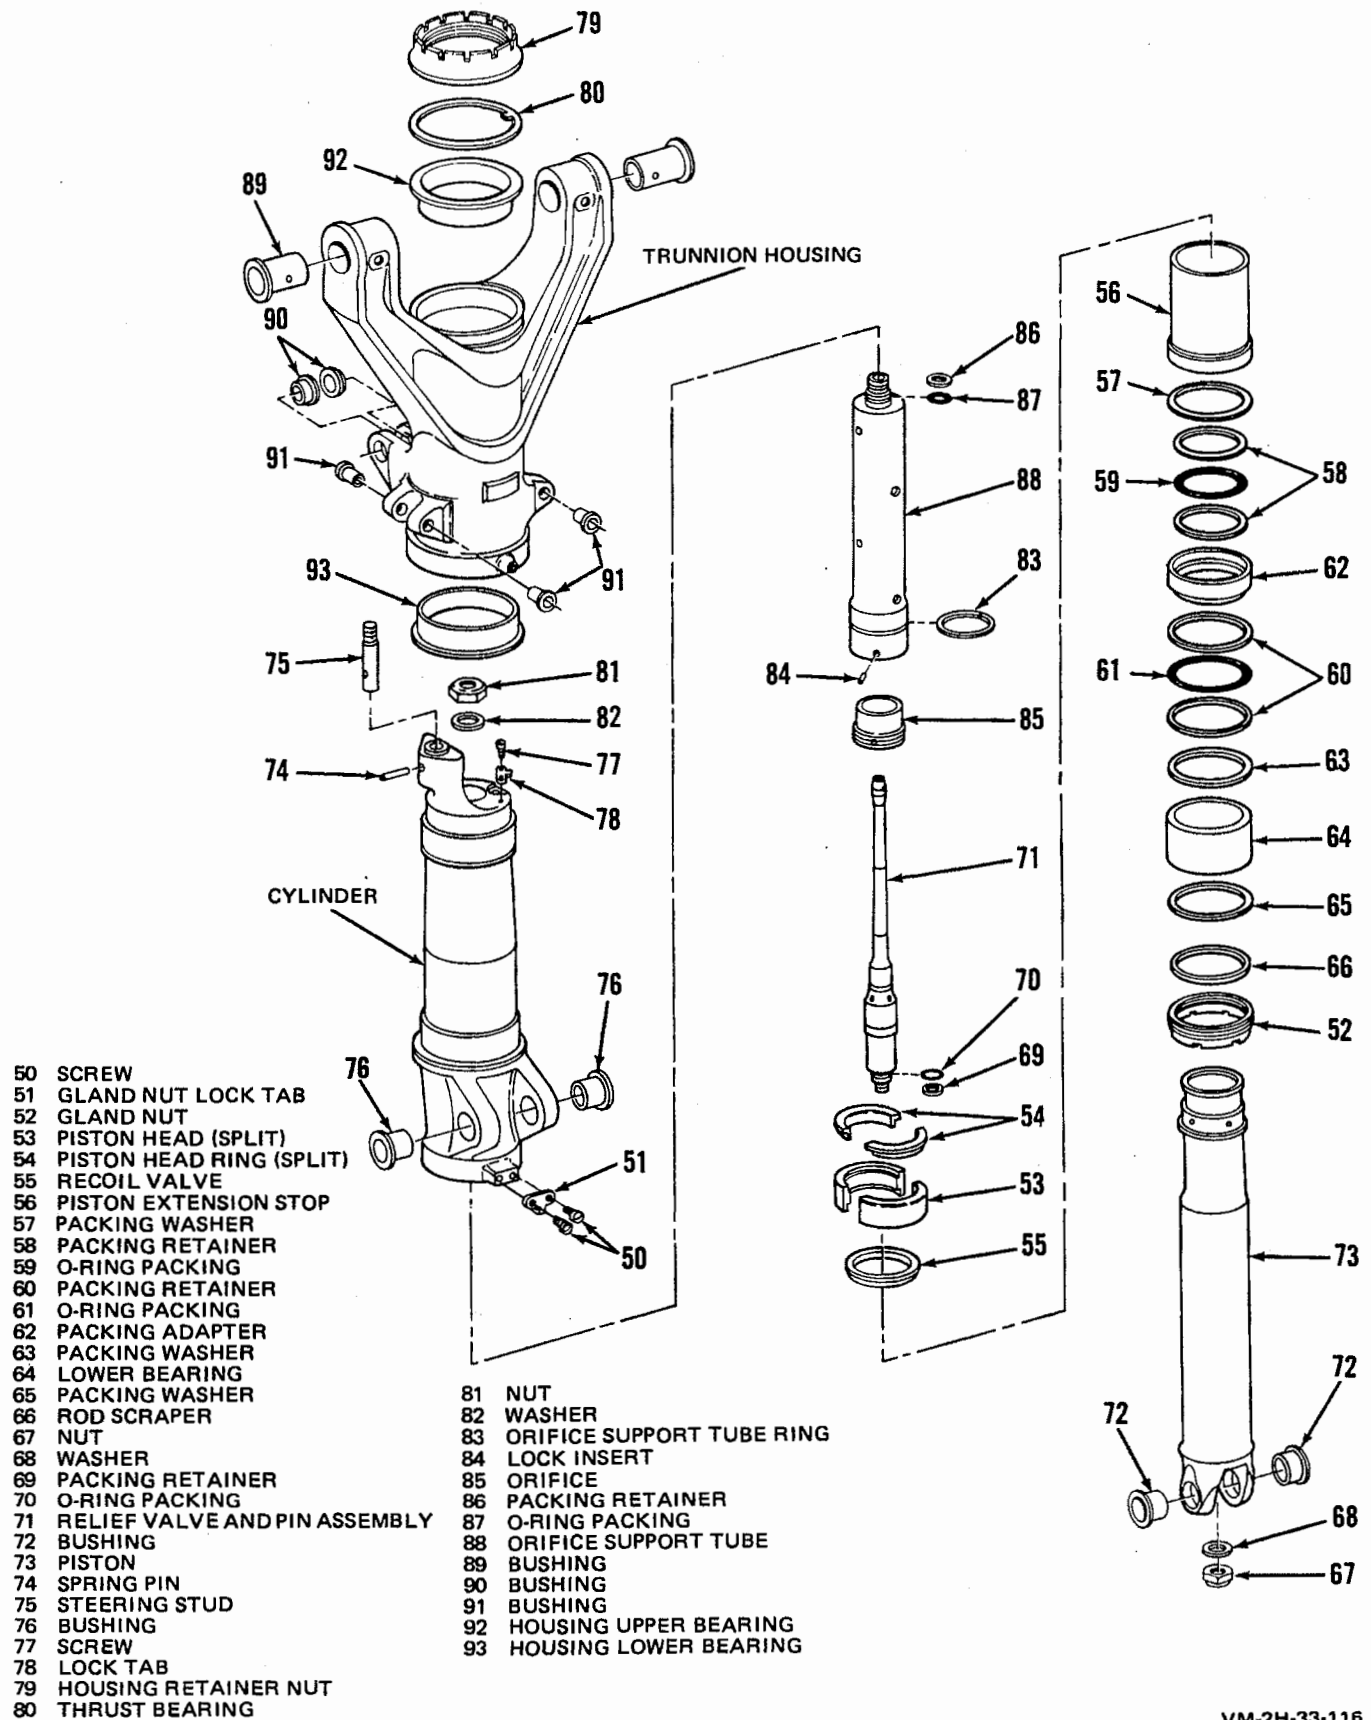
Nose Landing Gear Complete Shock Strut Assembly (Sheet 2 of 2)
